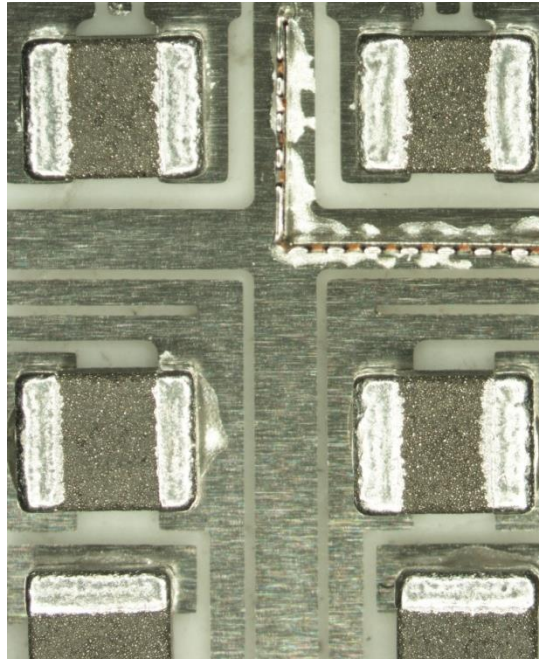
SMD package lead frame with a mu-metal barrier soldered into place prior to plastic encapsulation.
